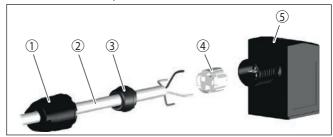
Connection, valve plug ISO 4400 with IDC crimping technology
